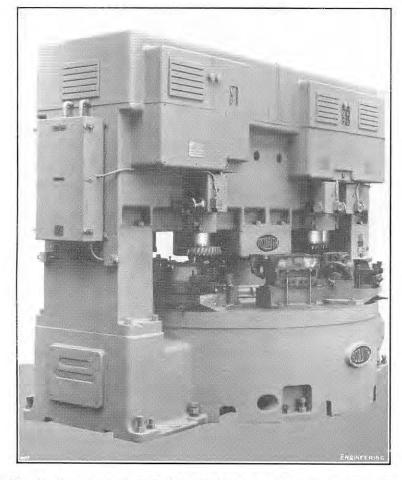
Continuous Rotary Milling Machine; William Asquith, Ltd.
